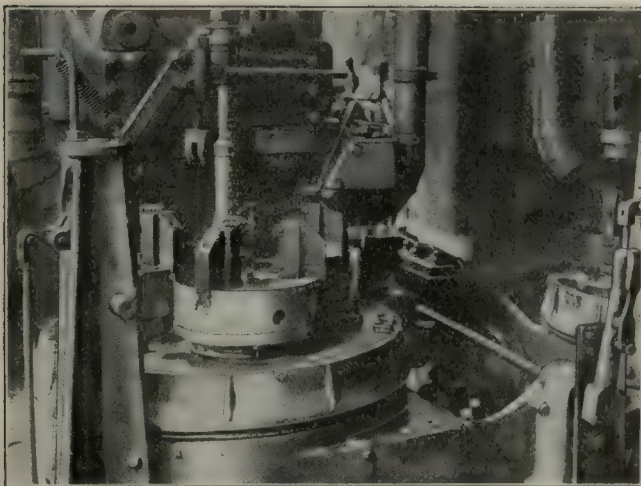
BORING OPEN END ON SPECIAL MACHINE
